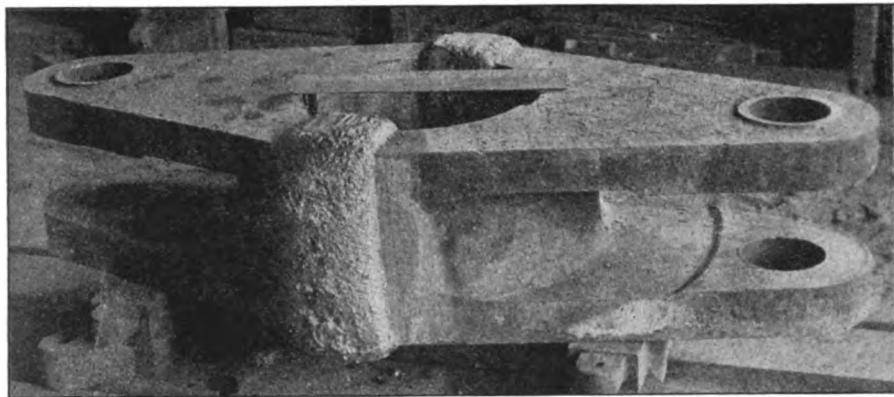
WELDS ON THE RUDDER HEAD OF THE STEAMER LEOPOLDINA AFTER THE RISERS AND POURING GATES WERE REMOVED
